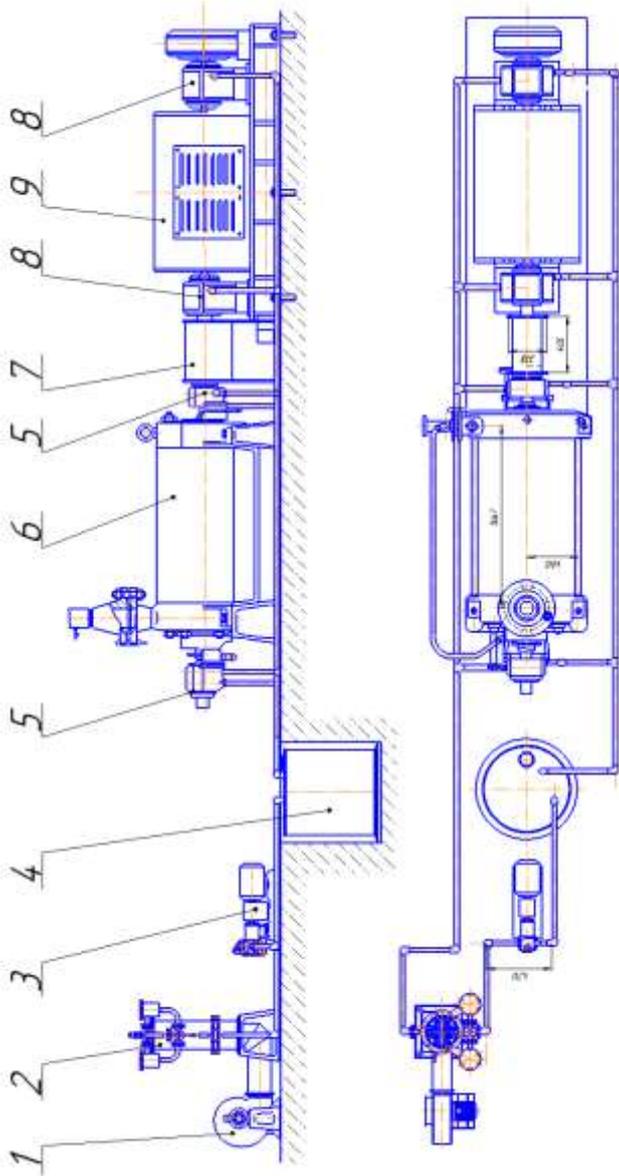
SCP pump unit with air-cooled oil system: 1- blower; 2 – oil cooler; 3 – oil pump; 4 – oil tank; 5 – SCP pump bearing; 6 – SCP pump; 7 – clutch; 8 – SCP pump driver bearing; 9 - SCP pump driver
